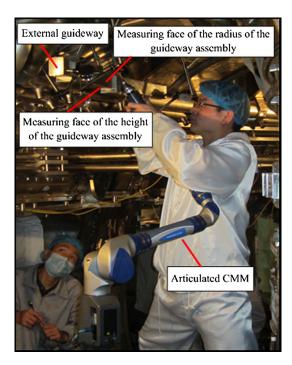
External guideway assembly inspected by articulated CMM.
